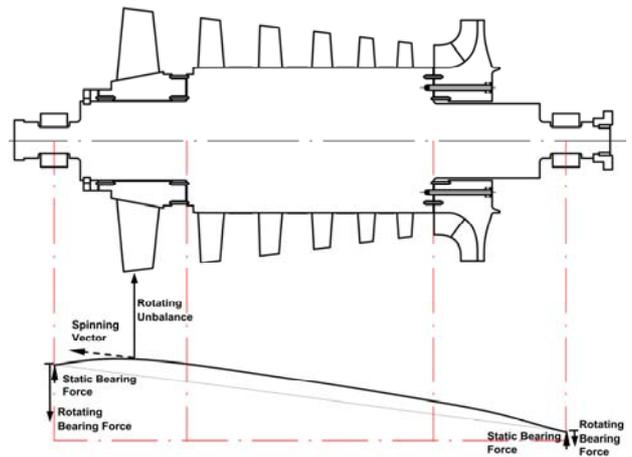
Bearing amplitudes and rotor shaft bending of C1-HTTC rotor with foreign damage on blade tip of titanium blisk
